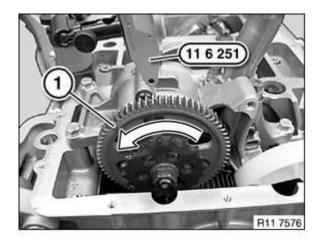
Turning Oil Suction Pump Gearwheel Courtesy of BMW OF NORTH AMERICA, INC.
